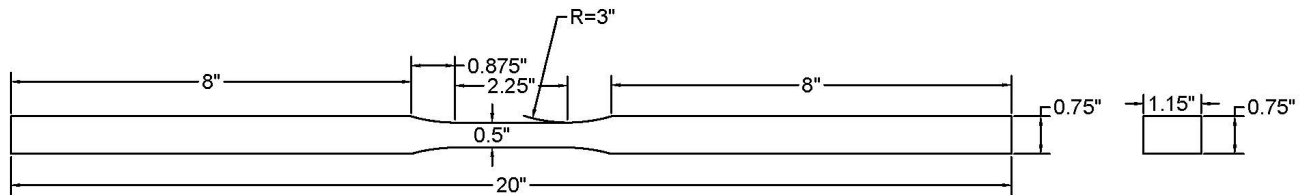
Tension coupon dimensions in accordance with ASTM E8
